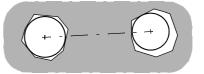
Assembly of a gauge compound of two cylinders which one has a variable diameter.
